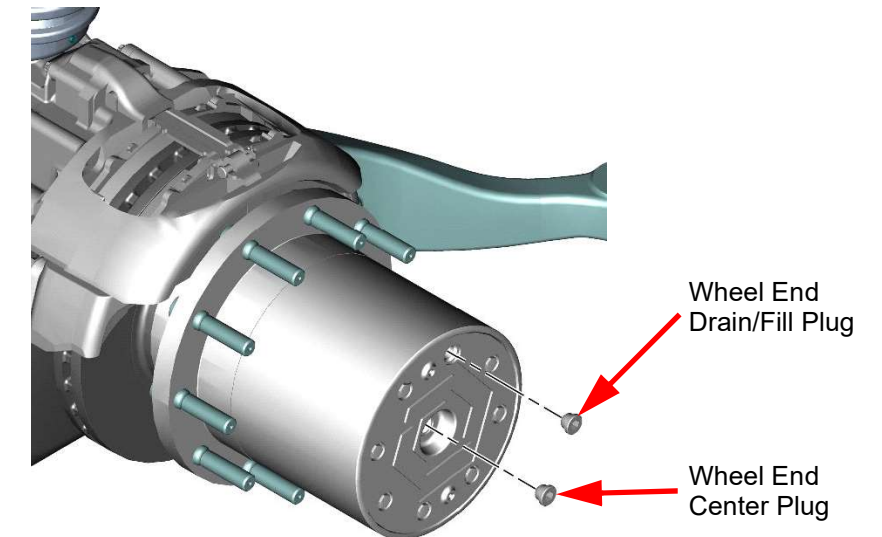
Installing Wheel End Drain/Fill Plug and Center Plug
